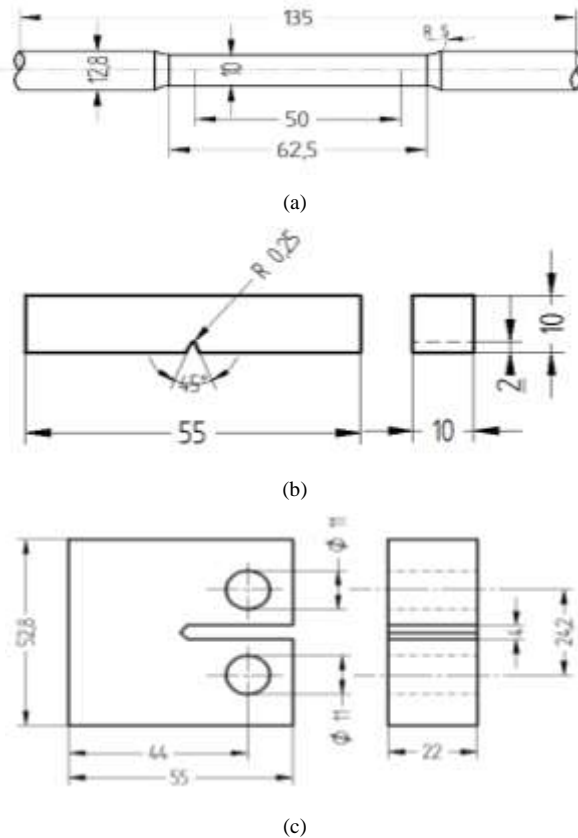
(a) Tensile specimen (b) Charpy test specimen (c) fracture toughness test specimen prepared as per ASTM standard.
